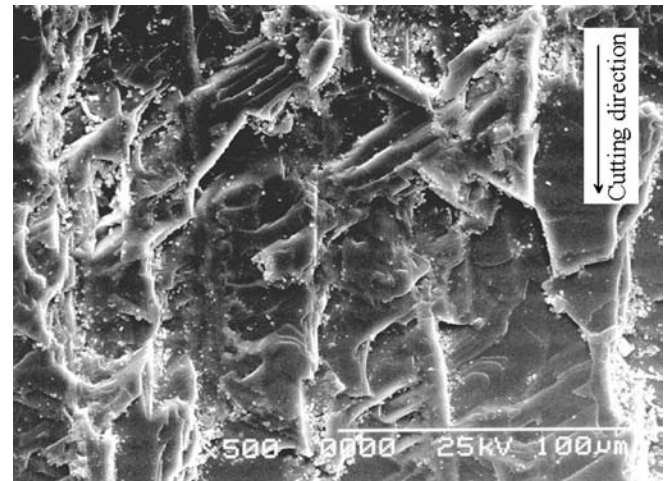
SEM photograph of the surface machined using a diamond tool with a  $-60^\circ$  rake angle during wet cutting
